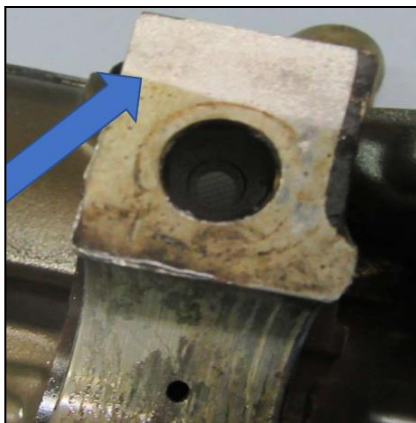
Fretting of the No. 1 camshaft bearing saddle
